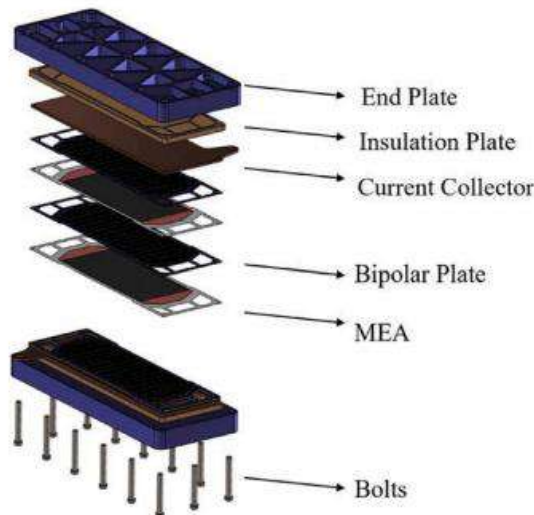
End plates, insulation plate and current collector with tie rod assembly [7]
